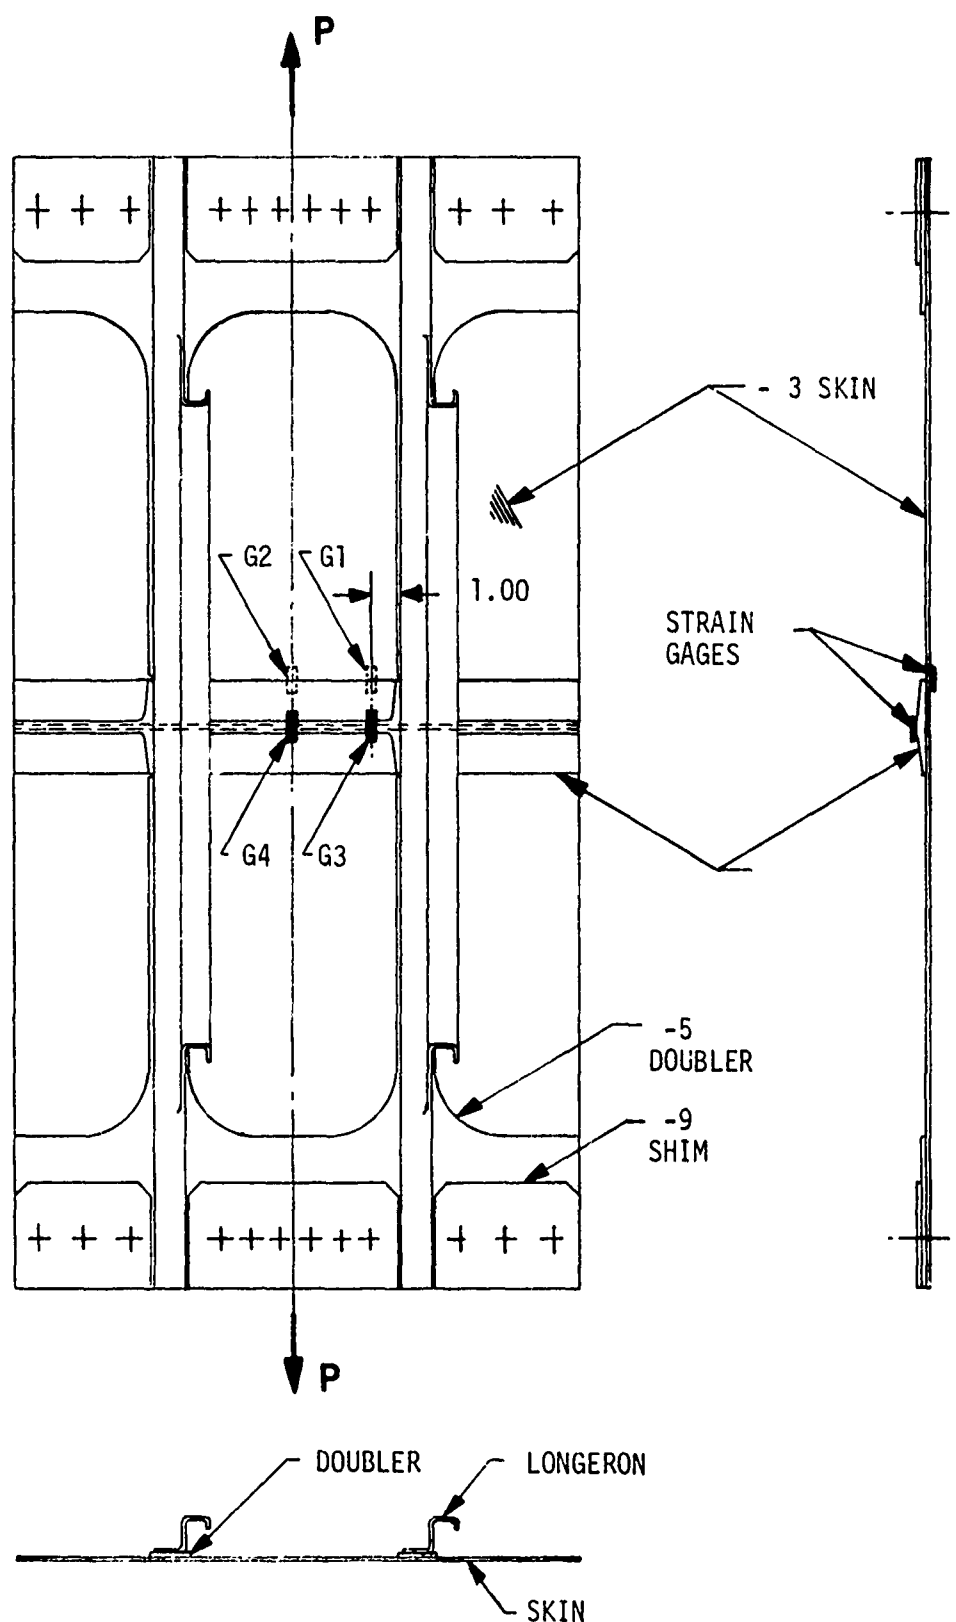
ADHESIVE BONDED, SINGLE LAP, HOOP SPLICE SPECIMEN
